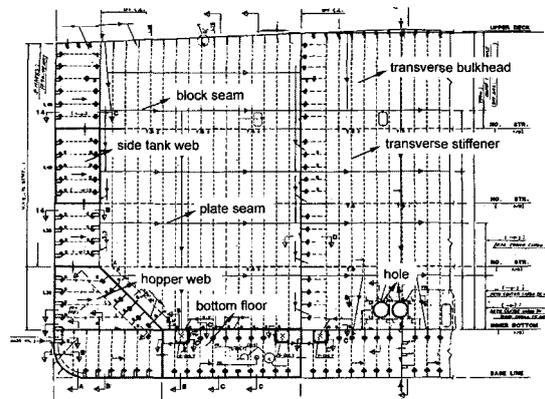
Typical transverse bulkhead section drawing of VLCC.
